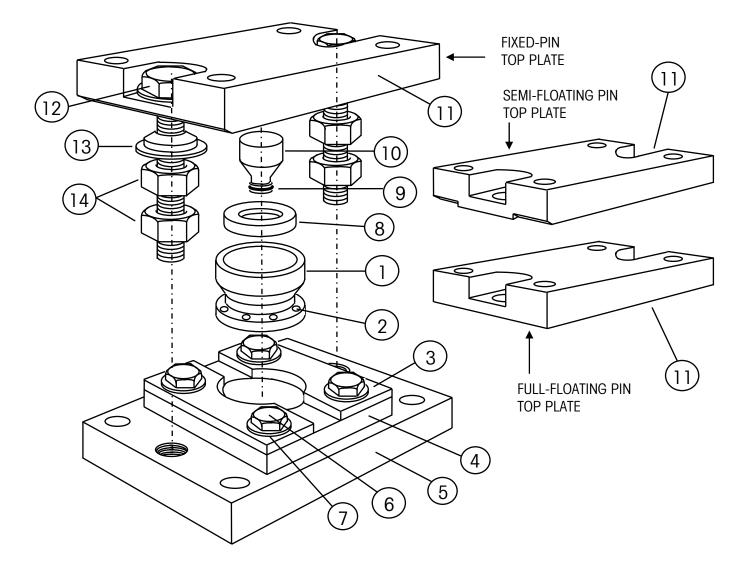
50,000-lb to 200,000-lb FLEXMOUNT HD Assembly
